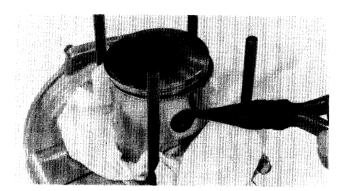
Cylinder/Piston Disassembly/Reassembly
